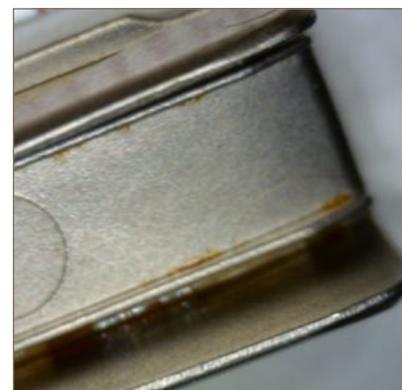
A picture of the surface rust observed on an as-received MIM stainless steel component, indicating that the vacuum sintering conditions were improper for meeting medical device needs
